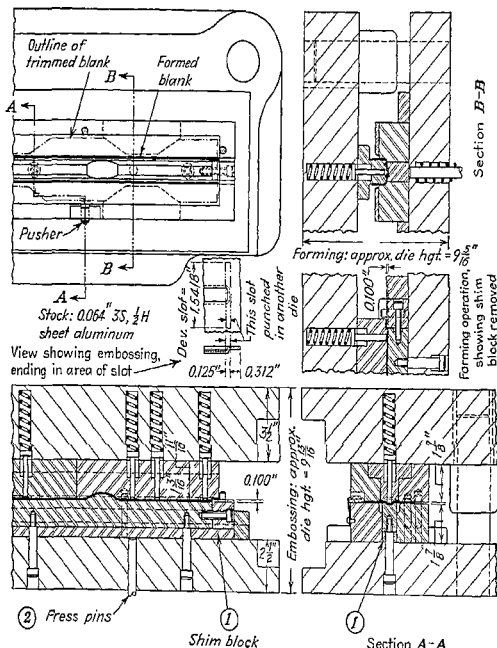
Flanging and embossing die. (Harig Mfg. Corp.)
